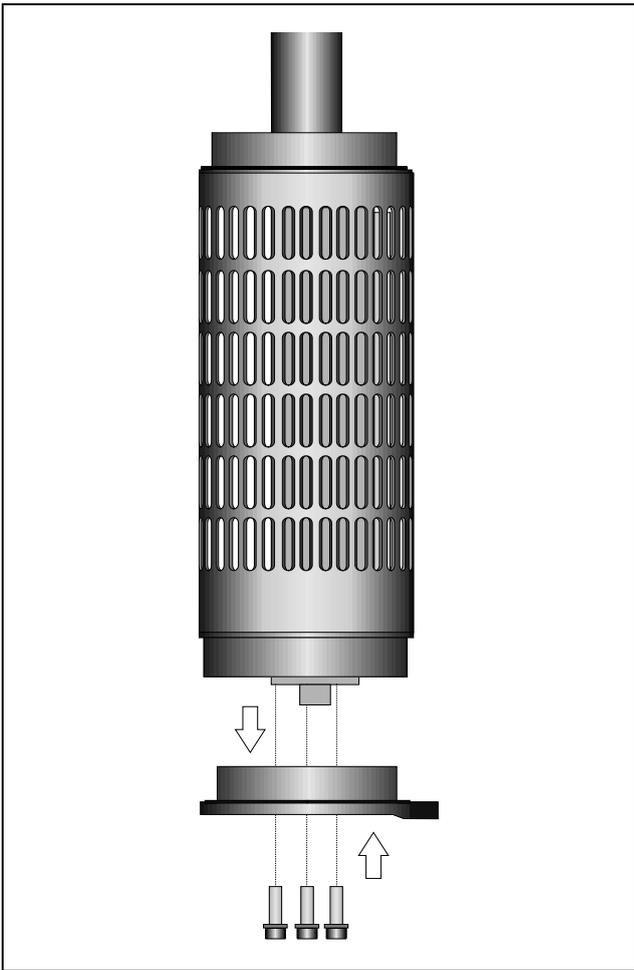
Preassembling the pressure channel, segmented element and centre flange
